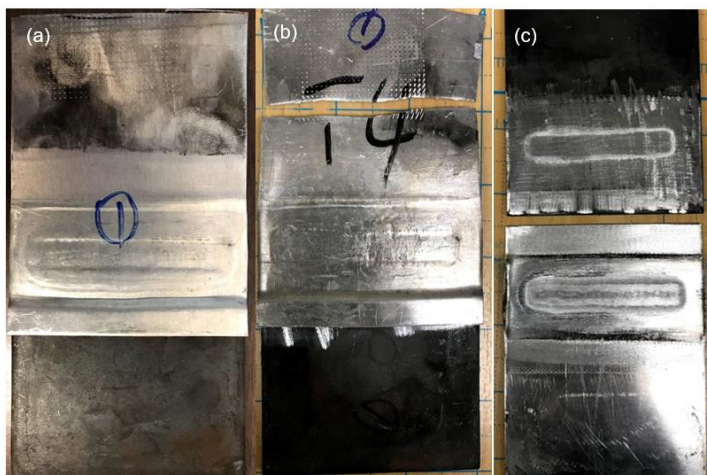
Patch weld of Al6061 to 4130 steel as welded (a), Al 6061-T4 as flyer (b) and Al 6061-T6 as flyer after lap shear test (c). The weld failed in different modes during test for the two cases.
